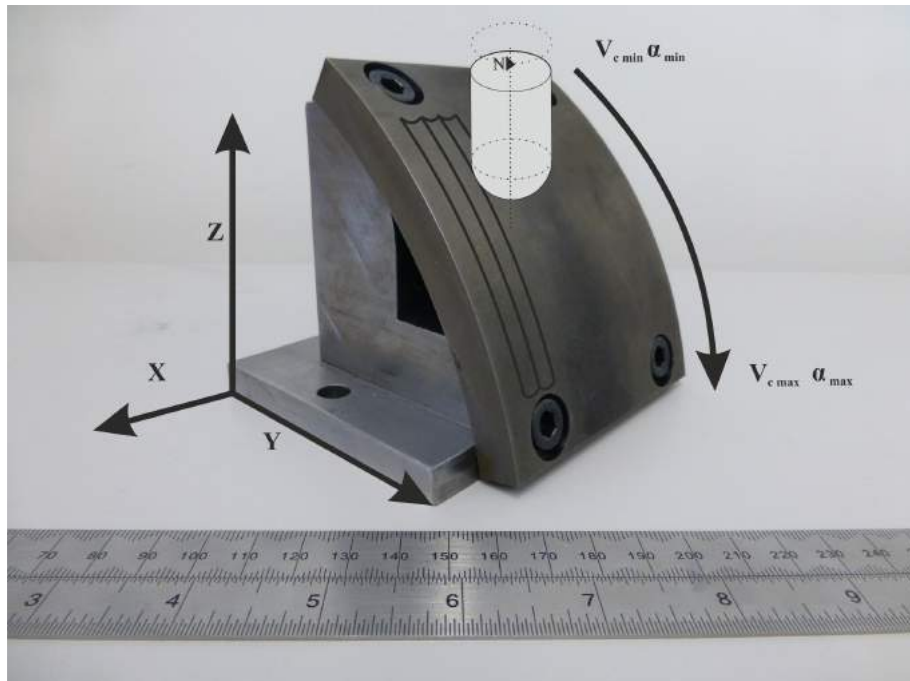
Photograph of a wire-EDM curved coupon and custom fixture with schematic superimposed tool path.
